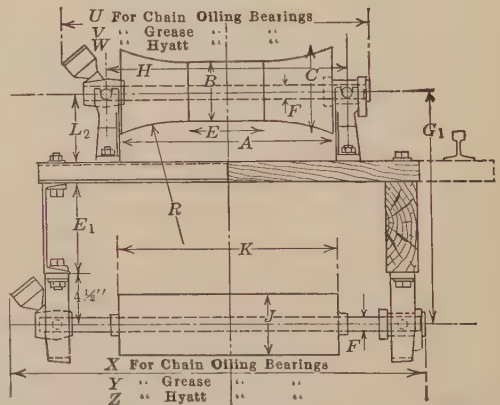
Dimensions of Uniroll Idlers and Return Idlers.
